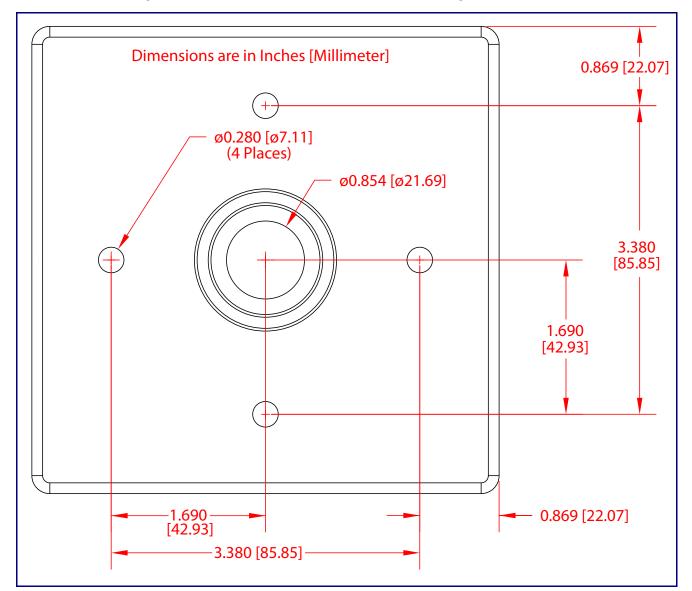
Unit Dimensions—Rear View with Mounting Hole Locations
